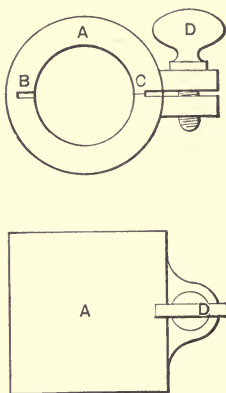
GRINDING MANDREL FOR PLUG GAGES.
